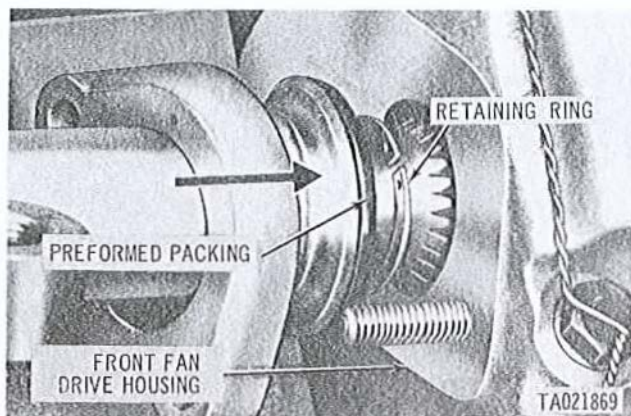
Positioning horizontal fan drive shaft in rear fan drive housing.
